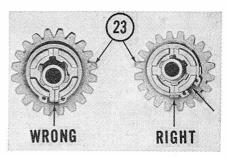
View of fourth gear positioning pieces and snap ring (23, 24 & 25-Fig. S2-18) assembled. Split in positioning pieces and opening in snap ring should not be aligned.
